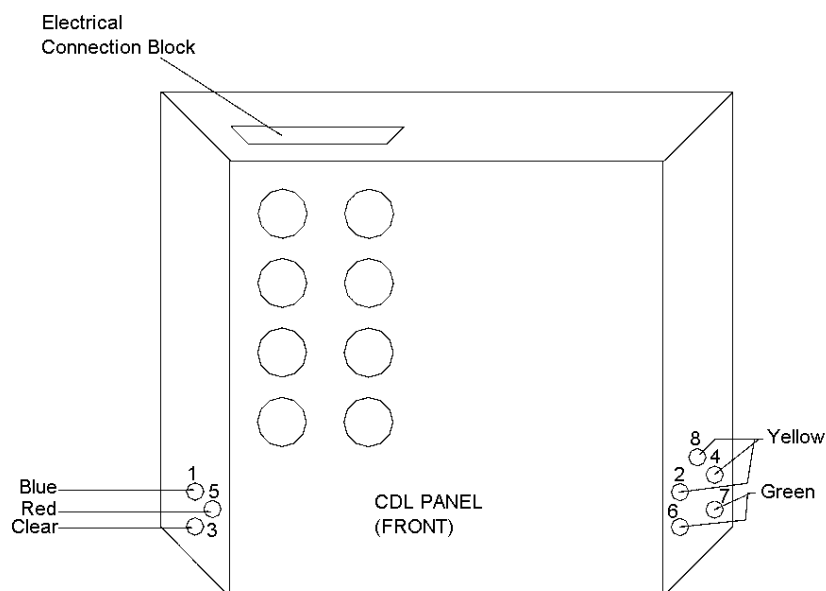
Air Pipe Connections to Central Door Locking Control Panel
